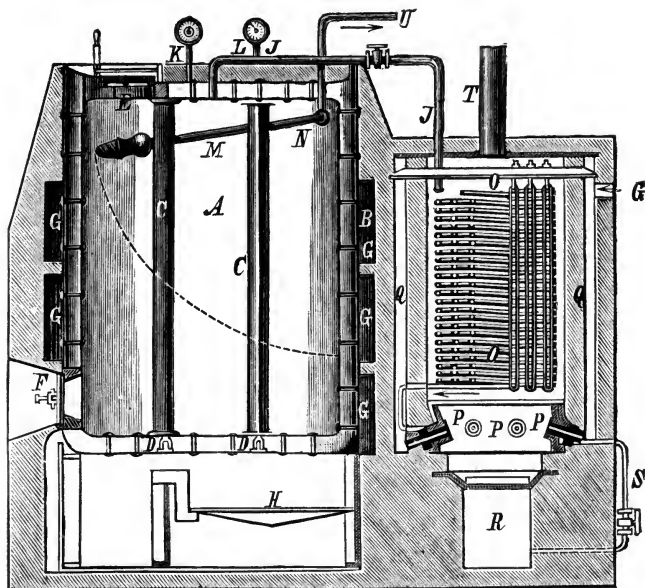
Steam Plant for Tallow Melting.—A, sheet-iron pan; B, jacket; C, steam pipe; D, stay rods; E, manhole; F, outlet; G, flue; H, hearth; J, pipe leading to furnace; K, pressure gauge of steam jacket; L, pressure gauge of digester; M, exhaust pipe with strainer; N, swivel joint; O, system of tubes; P, burner; Q, opening and air chamber; R, hearth; S, tube; T, flue; U, outlet pipe.
